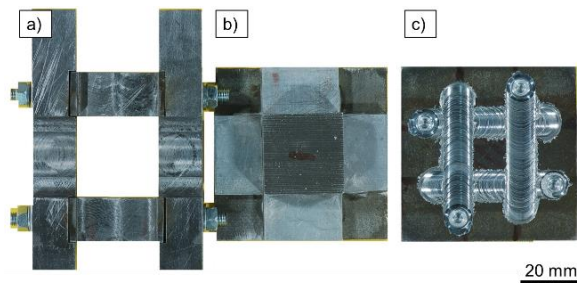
FSW box: (a) clamping device, (b) bottom look of FSW box and (c) top look of FSW box.
